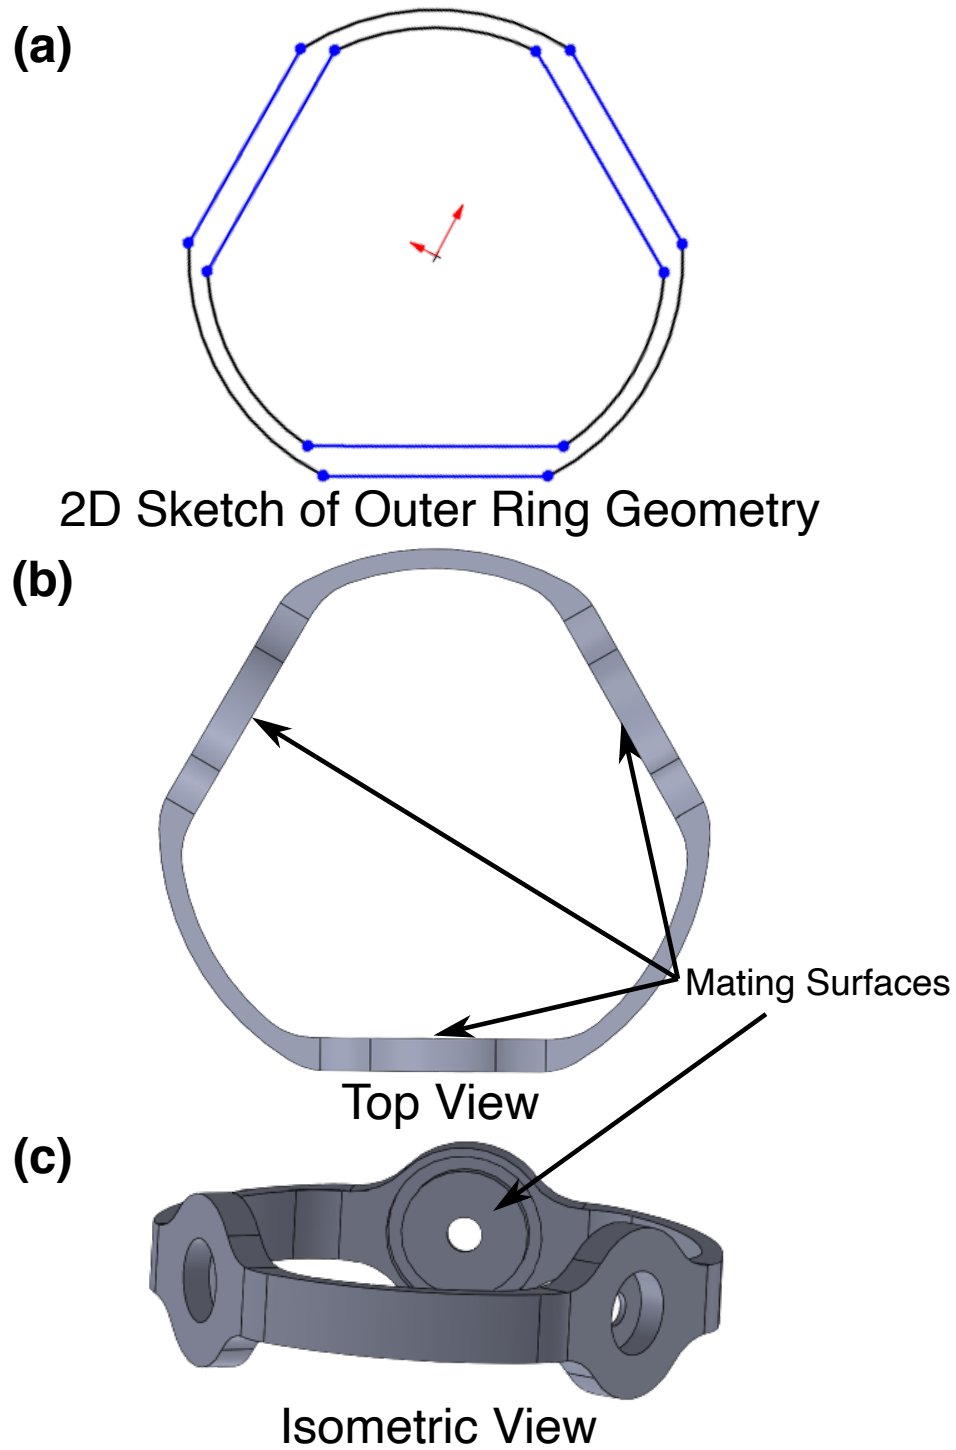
CAD model of outer ring for the delta mechanism. (a) 2D sketch of the outer ring geometry showing the underlying geometry, (b) Top view of the outer ring, and (c) Isometric view of the outer ring.
